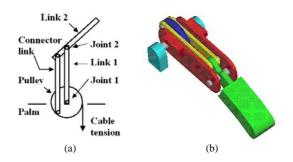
(a) Kinematic structure of the finger, (b) CAD drawing of the middle finger.
